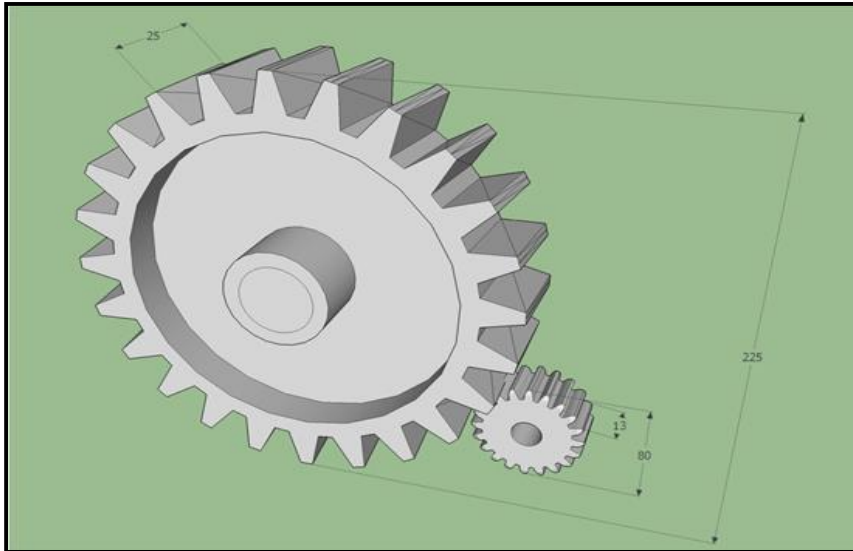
CAD design of the Drive & Driven Gear wheels
